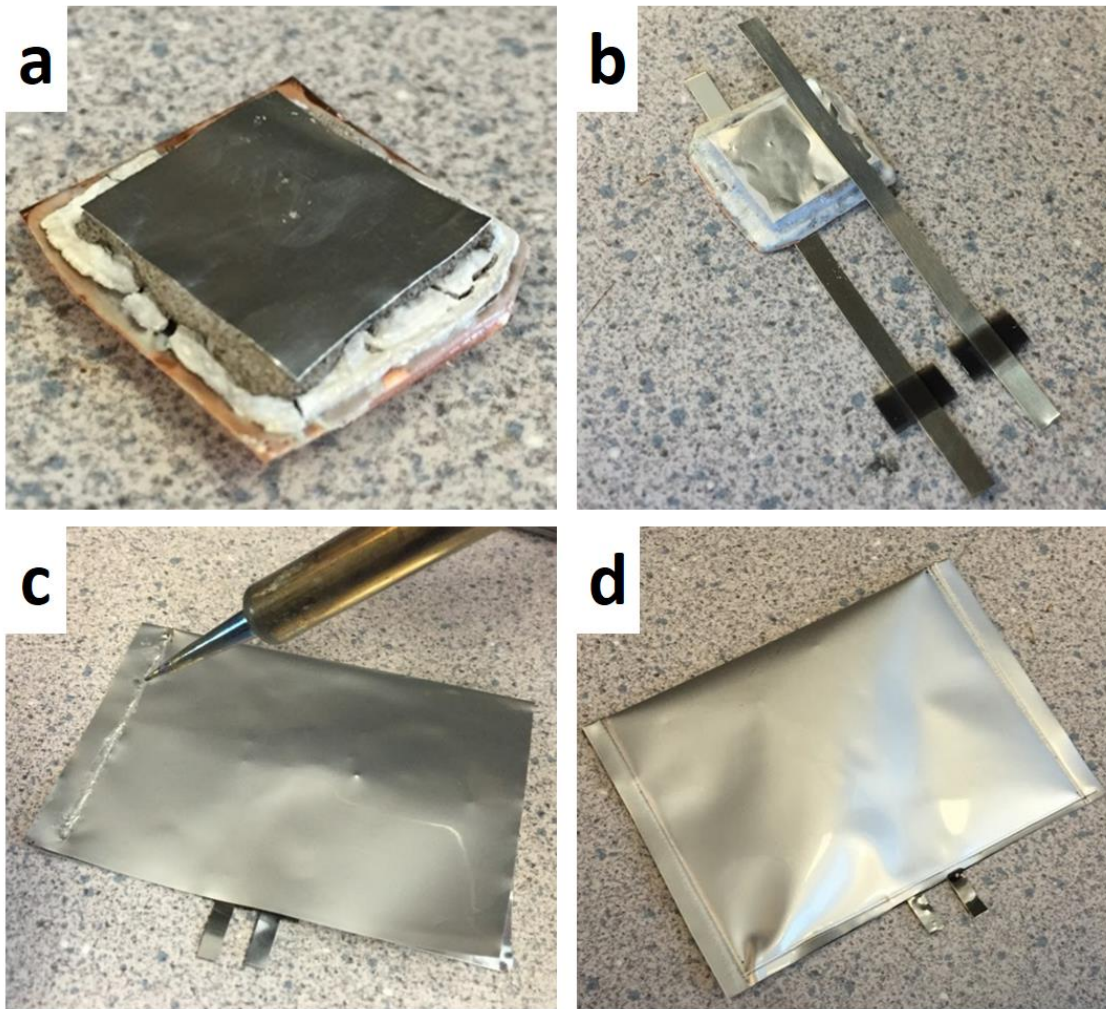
Photographs of (a) completed 3D printed battery, (b) conductive tab attachment on electrodes, (c) pouch cell sealing with heat iron, and (d) completed package of battery.
